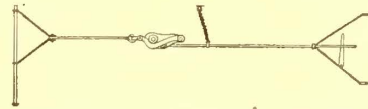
DETAIL OF BRAKE MECHANISM.
